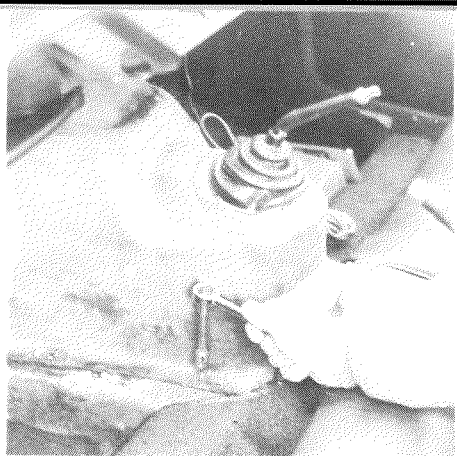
Undo the gearbox cover self-tappers with an 8mm socket or spanner
